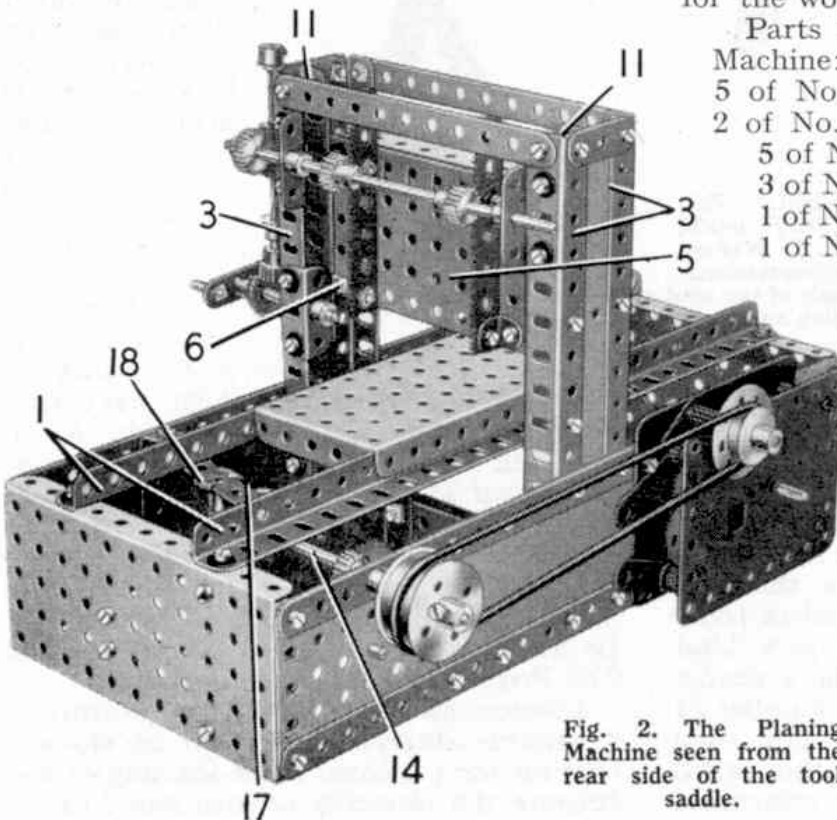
The Planing Machine seen from the rear side of the tool saddle.
